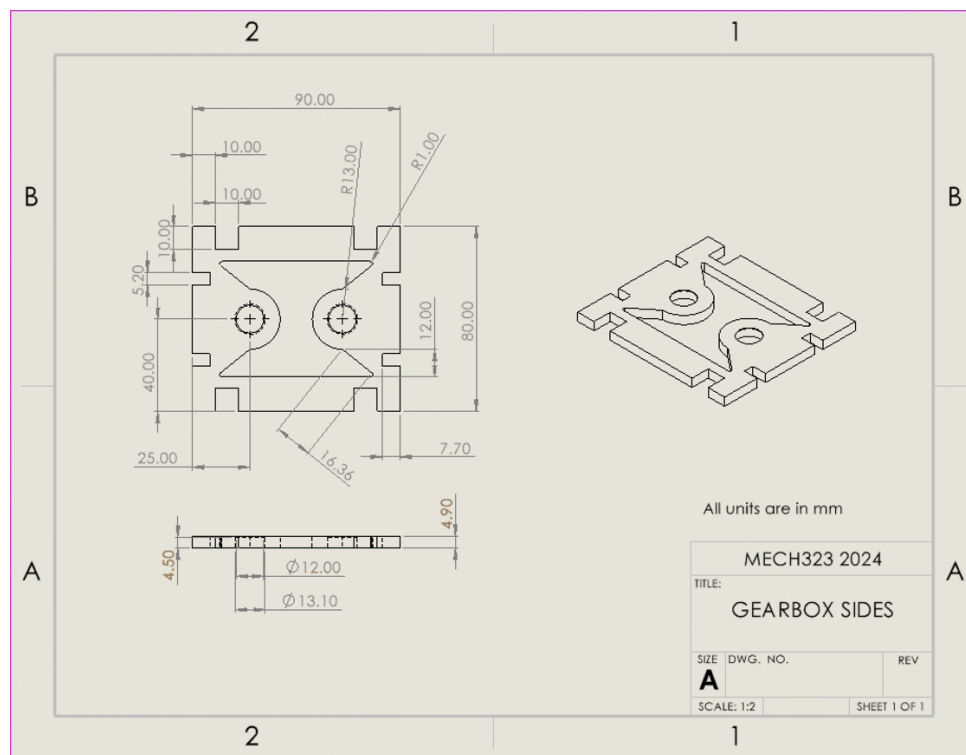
Fully dimensioned drawing of the housing's front/ back sides. The drawing includes front, top and isometric views, highlighting the dimensions for the bushing's placement
